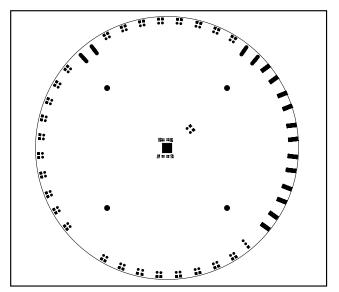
MAX105 EV Kit Component Placement Guide— Solder Side
